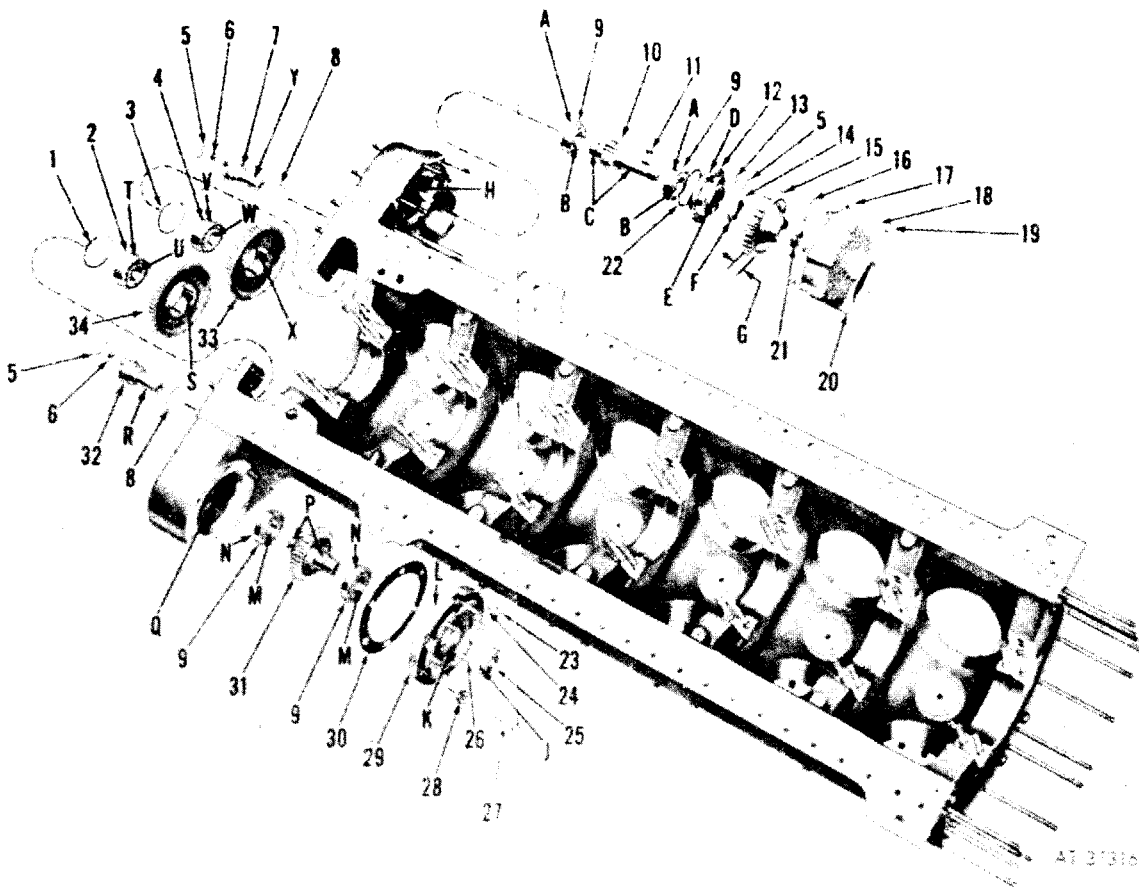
Generator and Starter Idler and Driven Gears and Shafts—Exploded View.
